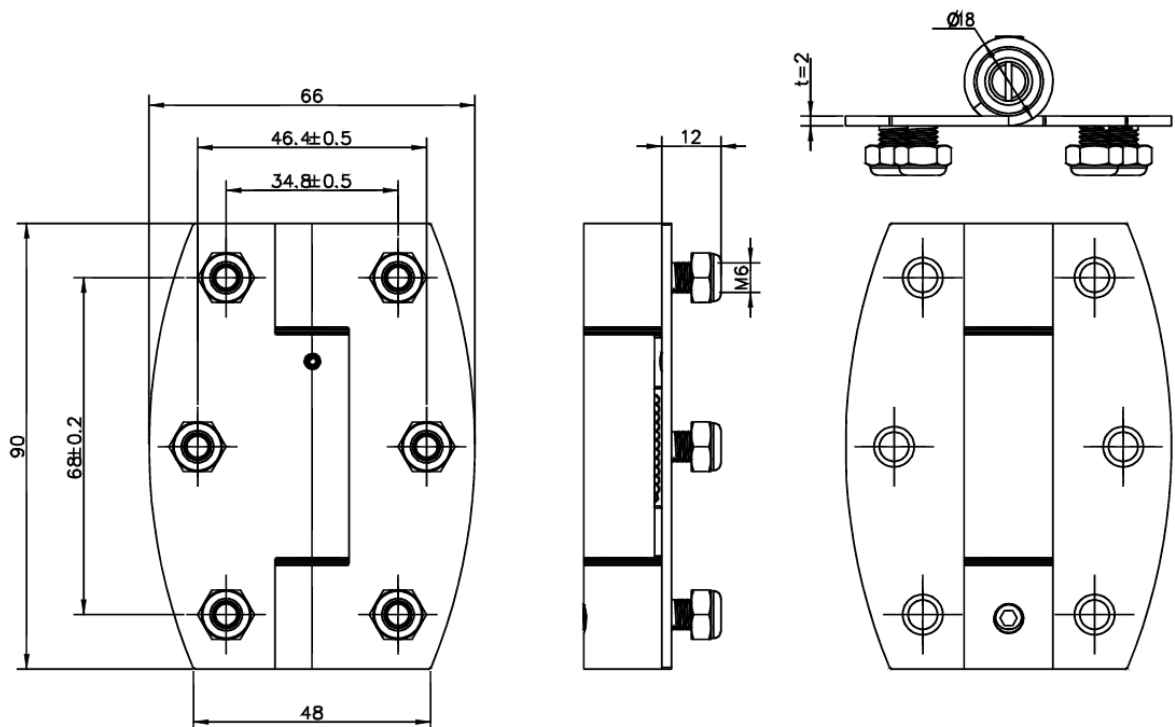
Details of Stainless-Steel 2.0 mm Thickness (Bottom) Wall-Mounting Brackets
